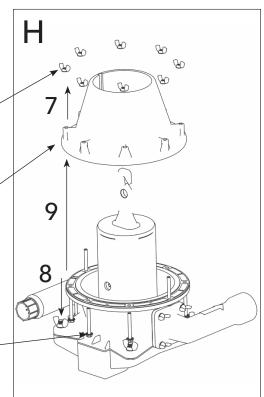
# FIGURE H: Remove the wing nuts in STEP 7. Remove all bolts in STEP 8. Lift and remove the pump cone in STEP 9.
